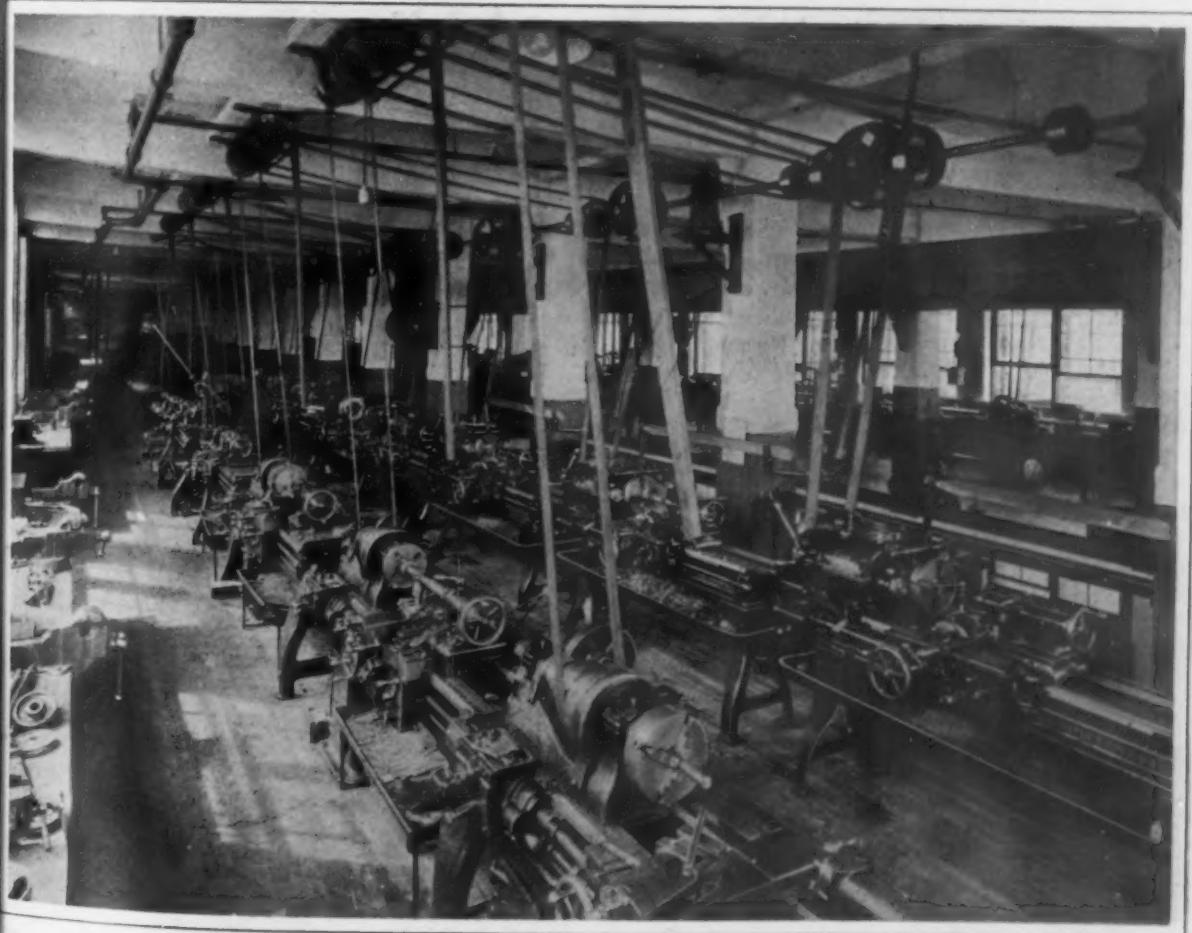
View in the Machine Shop Showing in Row to Right Lodge & Shipley and American Lathes Equipped with Single Pulley Drives
